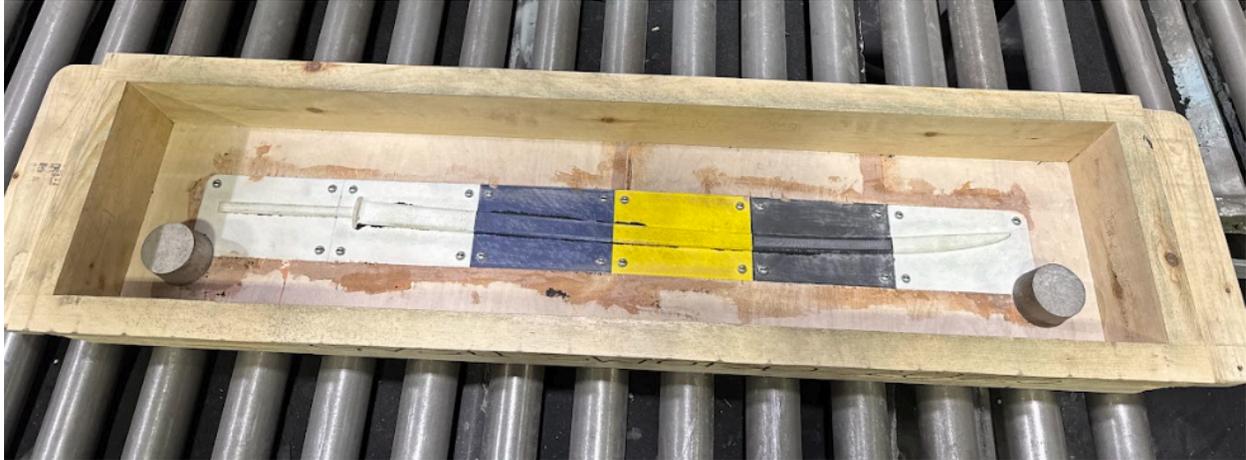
3D printed pattern pieces placed and fastened in the drag flask
